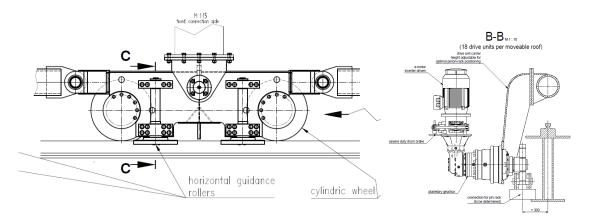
Bogie with lantern gear drive unit (design for France Rugby Stadium) [17]
